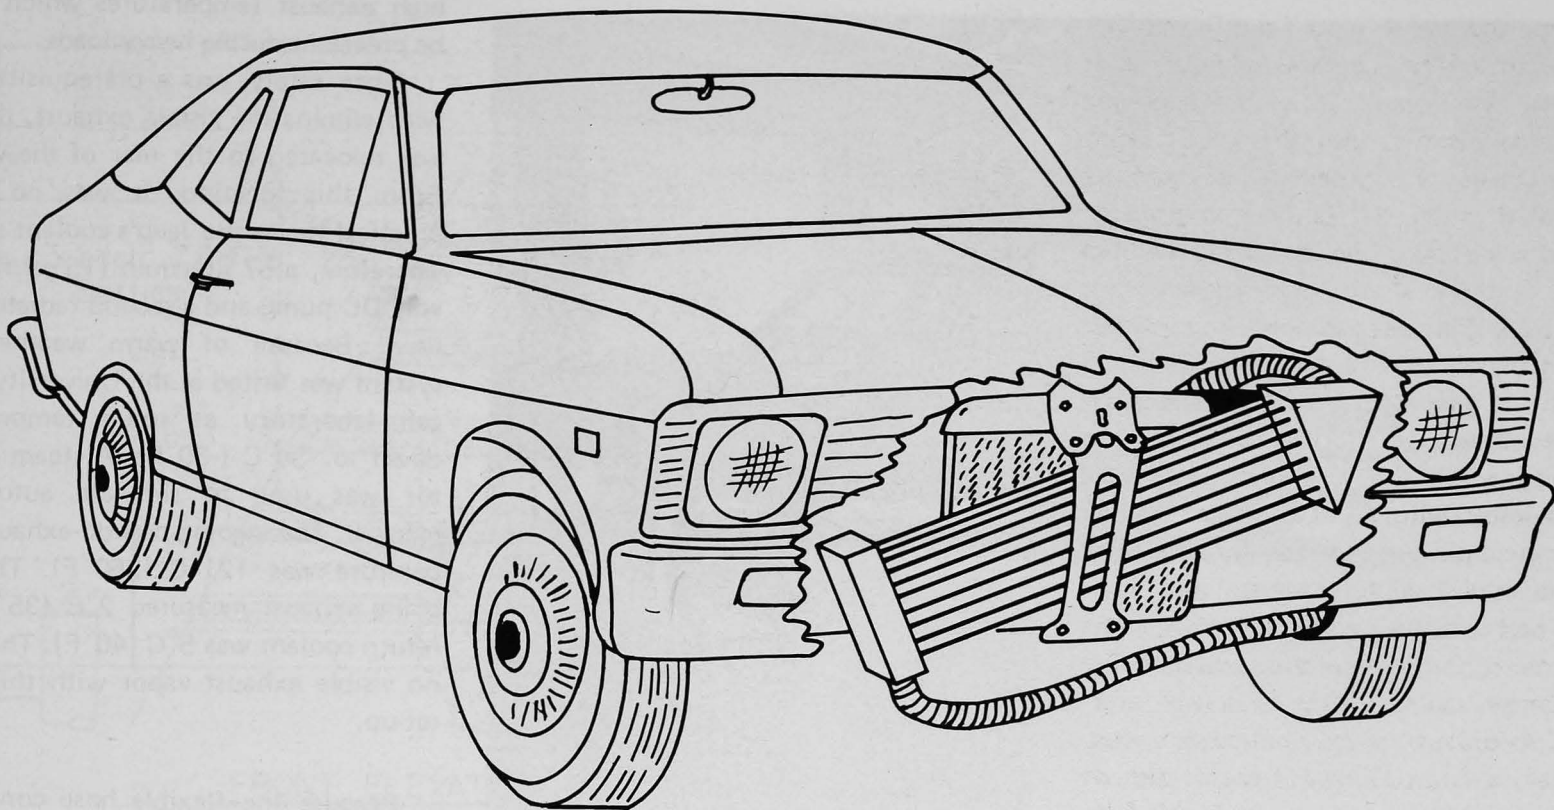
Cooler-condenser mounting on 1974 Chevy Nova.
